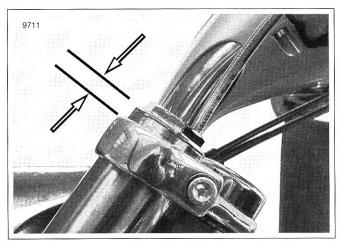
Fork Tube Projection (6.4-9.7 mm)
